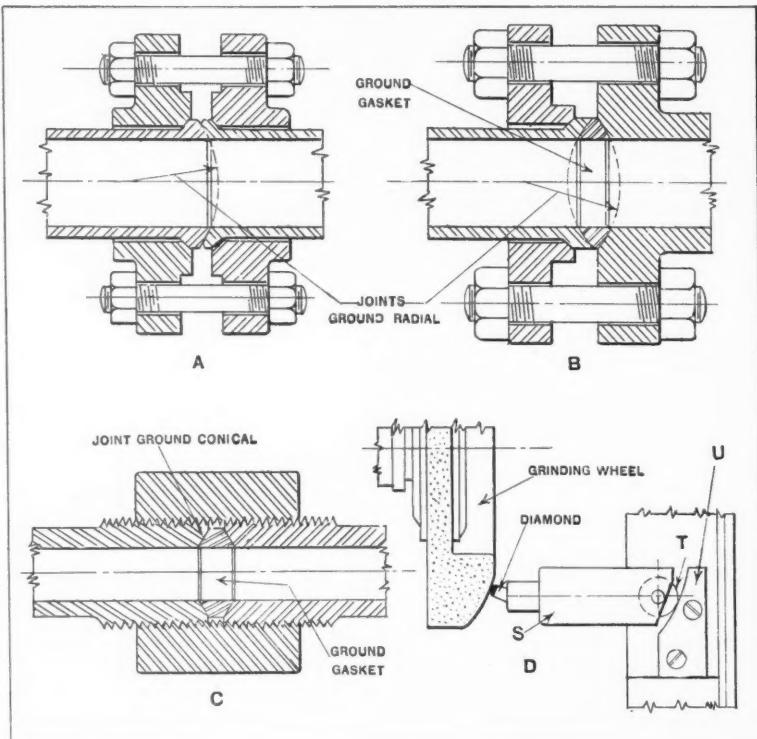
Types of Pipe Joints Ground on Machine Illustrated in Fig. 2, and Wheel-truing Device
